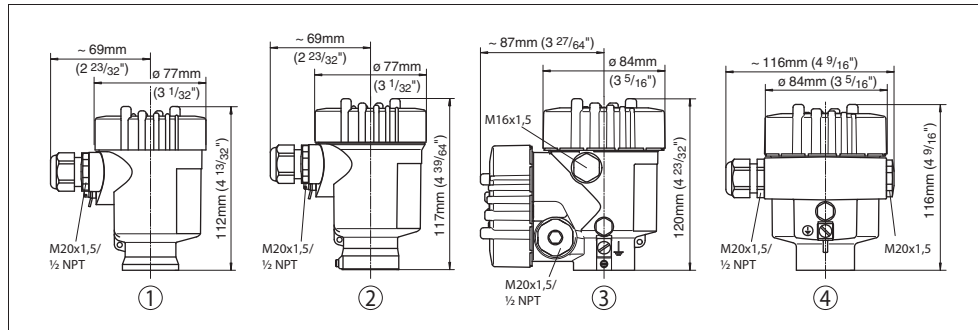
Housing versions (with integrated PLICSCOM the housing is 9 mm/0.35 in higher)
